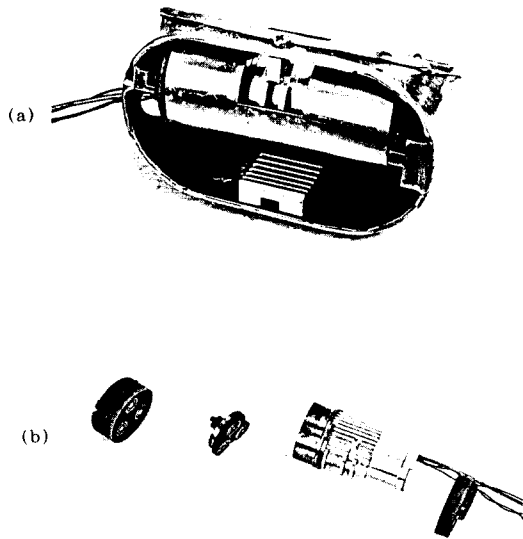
Pictures of (a) the total actuator assembly, and (b) the rolling-cylinder assembly.
